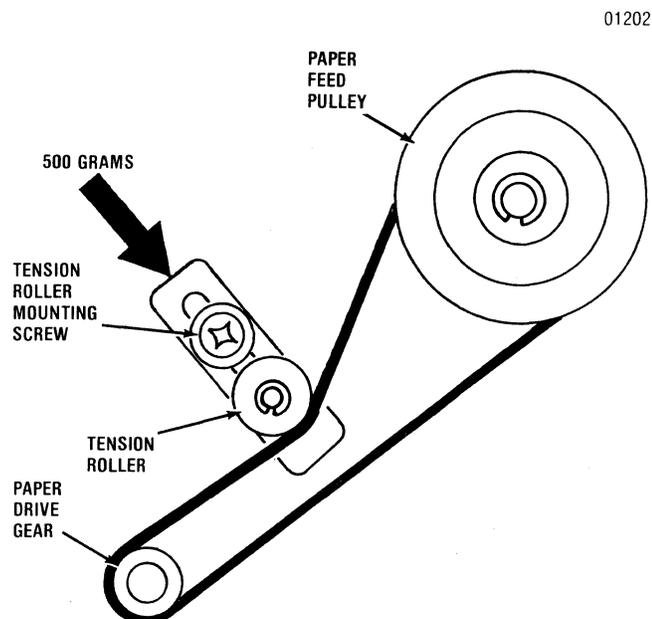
PAPER DRIVE BELT ADJUSTMENT
